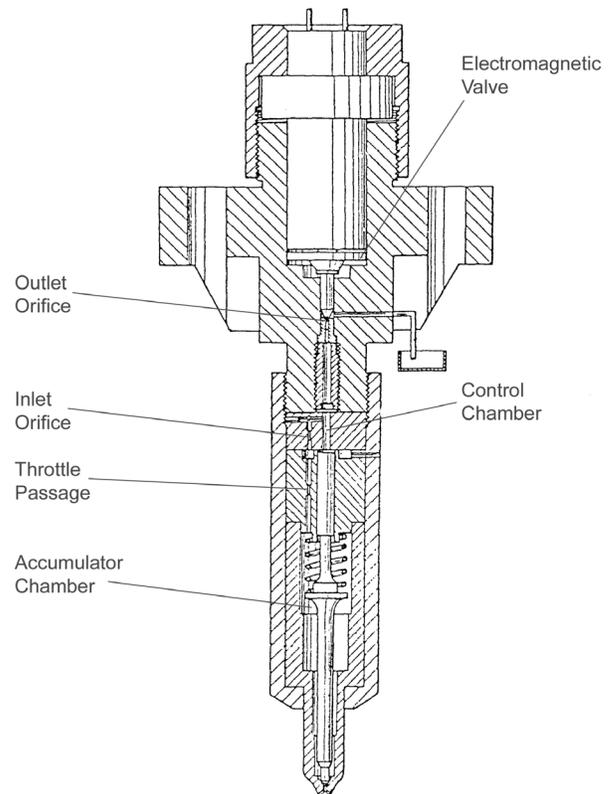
Sectional drawing of Accumulator type injector [1, 2, 3].
